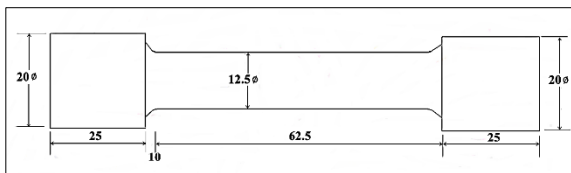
Dimensions of tensile specimen (all dimensions are in mm)
